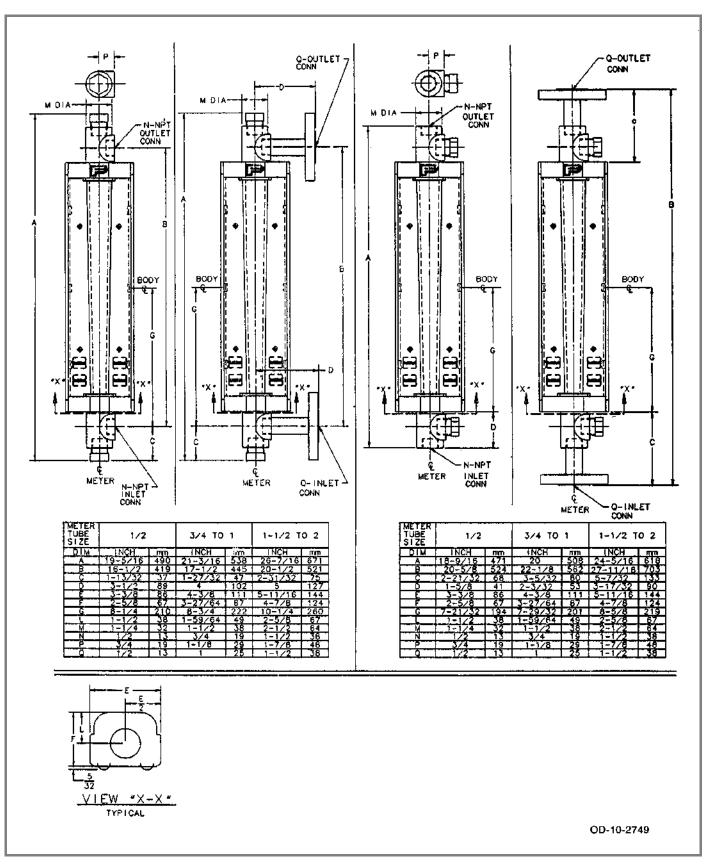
OUTLINE DIMENIONS OF BASIC METER
